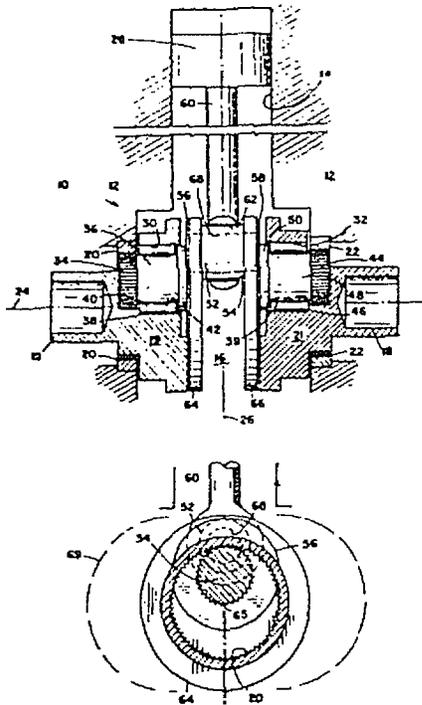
Cherry one-cylinder engine: example of a "built-up shaft" (P34).
